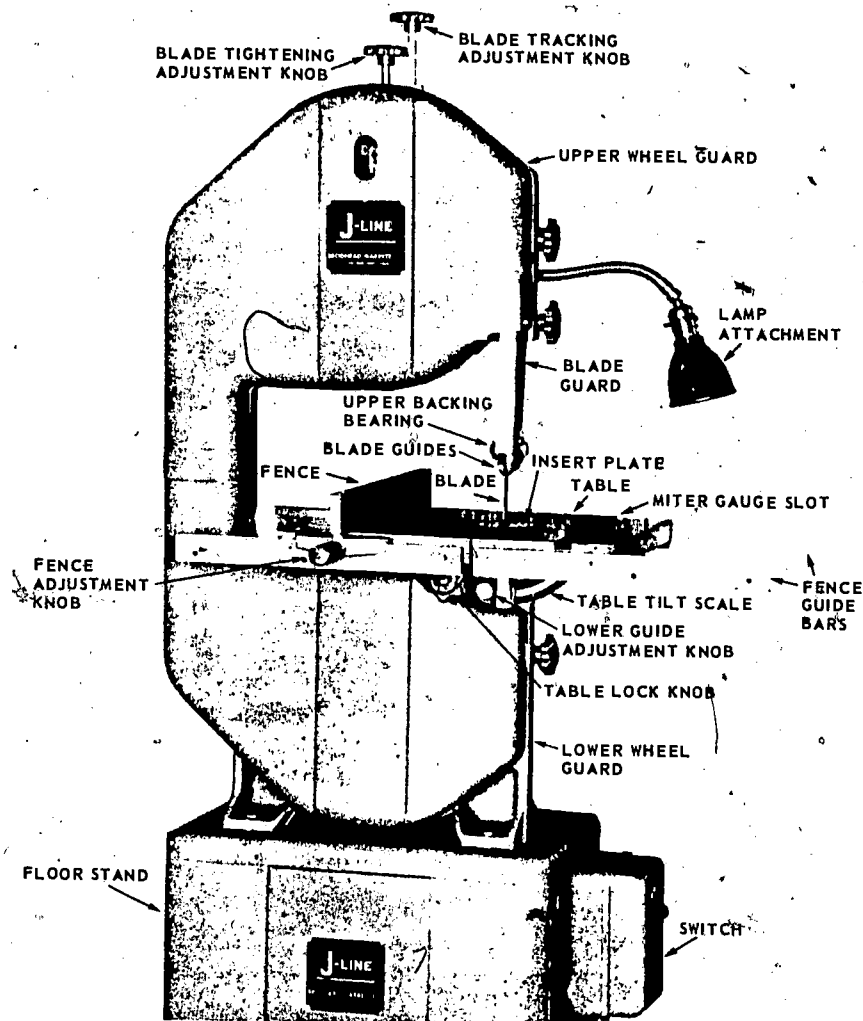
Parts of a 14 in. bandsaw. (Brodhead-Garrett Co.)
